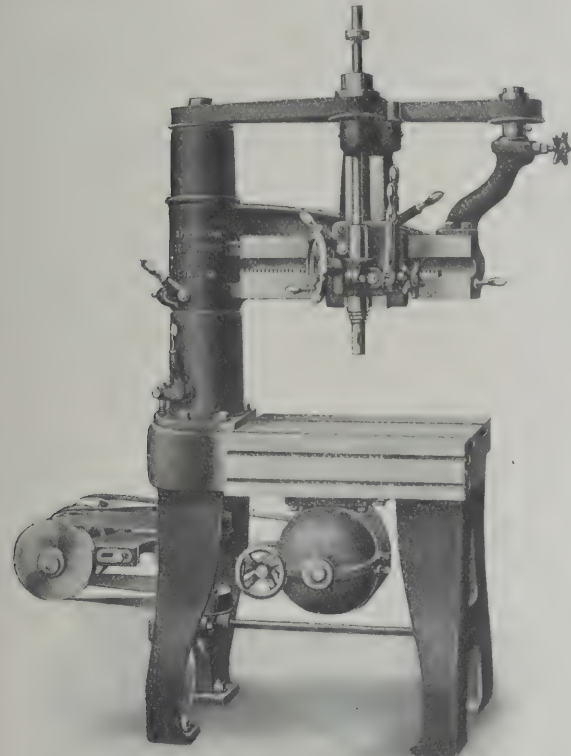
American Tool Works Co.'s 2-foot Radial Drill with Motor Drive
